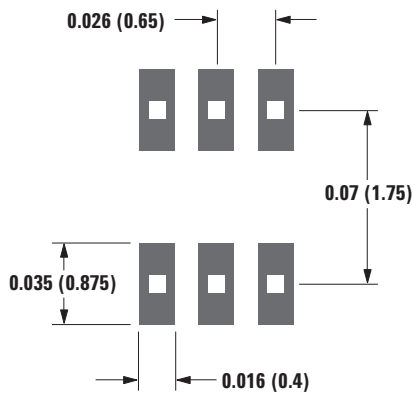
PCB Pad Layout. Dimensions are in inches (millimeters).
